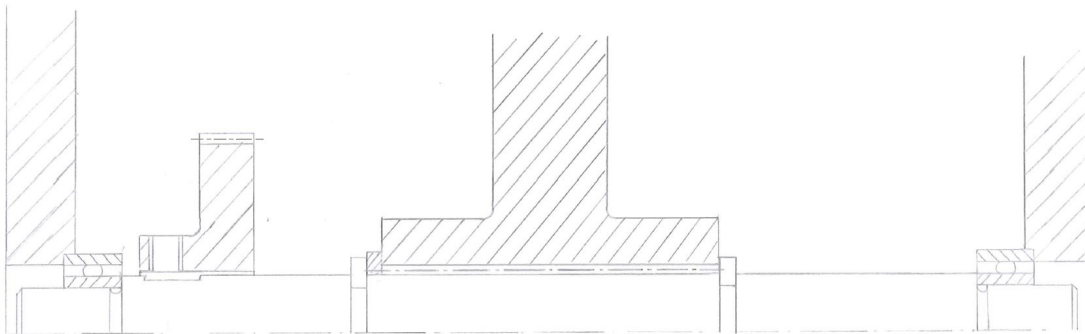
Technical drawing of the spline shaft with the flywheel maintained in position with two snap rings and an adjustment disk. It is maintained and aligned by a set of ball bearings at each side and a gear attached with a clamping screw transmit the torque from the actuator.
